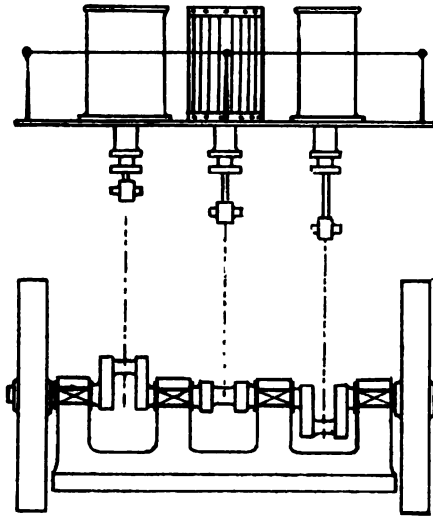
VERTICAL MACHINE—OVERHUNG FLY-WHEELS.
